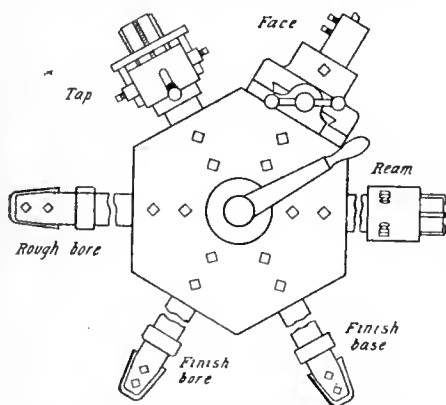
TOOL ARRANGEMENT FOR SHELL BORING.
